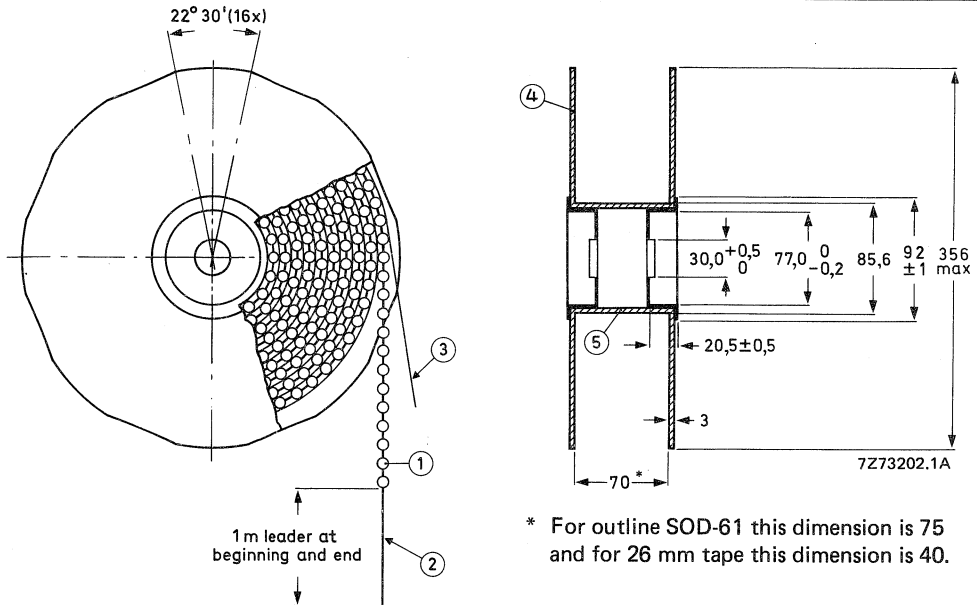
Reel dimensions (mm) for axial-leaded components.
